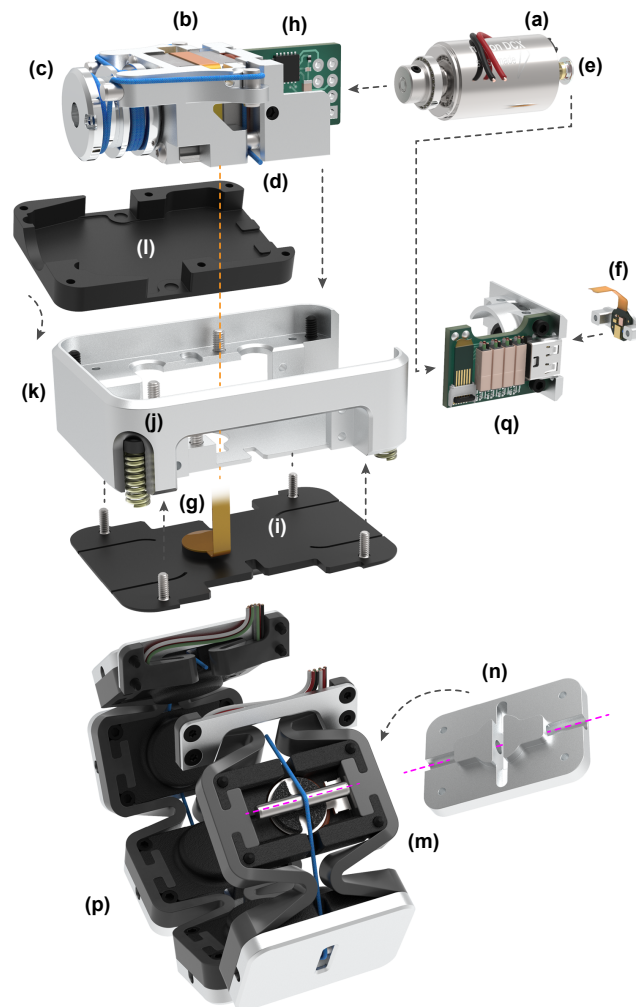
Tasbi Exploded View – The squeeze mechanism consists of a 12 mm DC motor (a) and a 13 mm Harmonic Drive gearbox (b) which drives a two-sided spool (c) to create tension in a UHMWP cord (d). Spool position feedback is provided through an optical encoder consisting of a reflective code wheel (e) and optoelectronic sensor (f). Squeeze force feedback is measured via a force-sensing capacitor (g) and signal conditioning PCB (h). The force sensor is held in light compression against a bottom plate (i) with four corner springs (j). The drive assembly drops into the main housing (k) and is secured in place with a housing lid (l). Each vibrotactor unit (m) contains a 10 mm LRA vibrotactor and a smooth stainless steel pin to convert cord tension into normal force. Vibrotactor units are clipped into elastic sidings (n) and secured with lids (o). All signals and power to and from Tasbi are transmitted over a micro-HDMI cable that connects to an internal breakout PCB (q).
